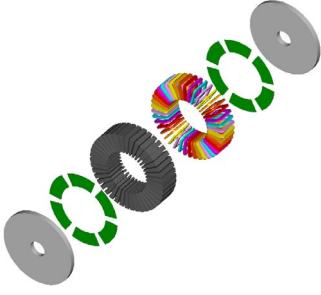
Exploded view of the considered axial flux seven-phase machine.
